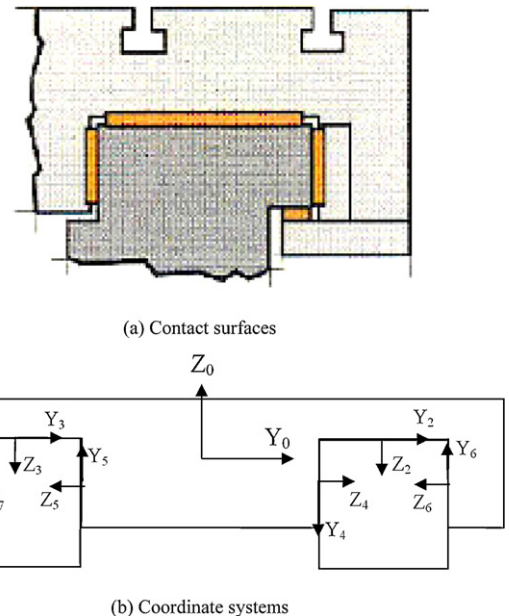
Machine tool slide-guideway, (a) contact surfaces and (b) coordinate systems.
